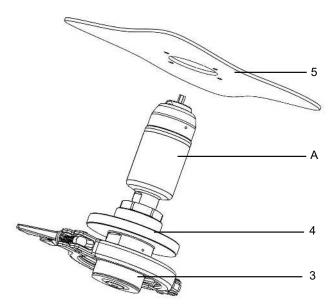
Disassembling the pneumatic stainless steel actuator – housing
